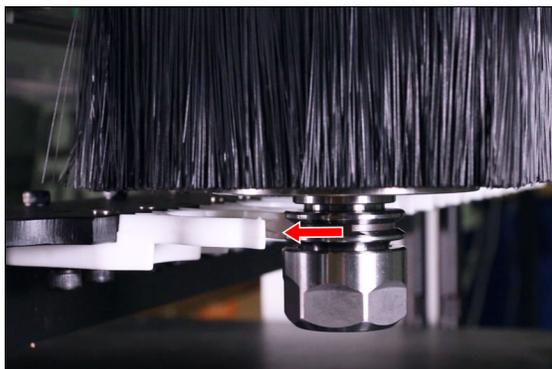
Aligning the ATC fork with the tool holder's groove.
